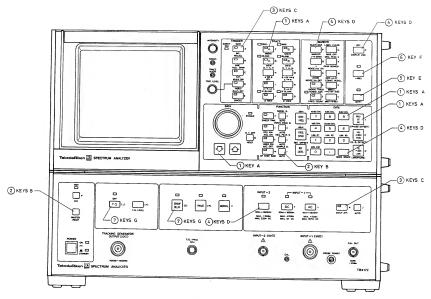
TR4172 MECHANICAL PARTS RF KEY BLOCK MEP-352 ASSEMBLY
